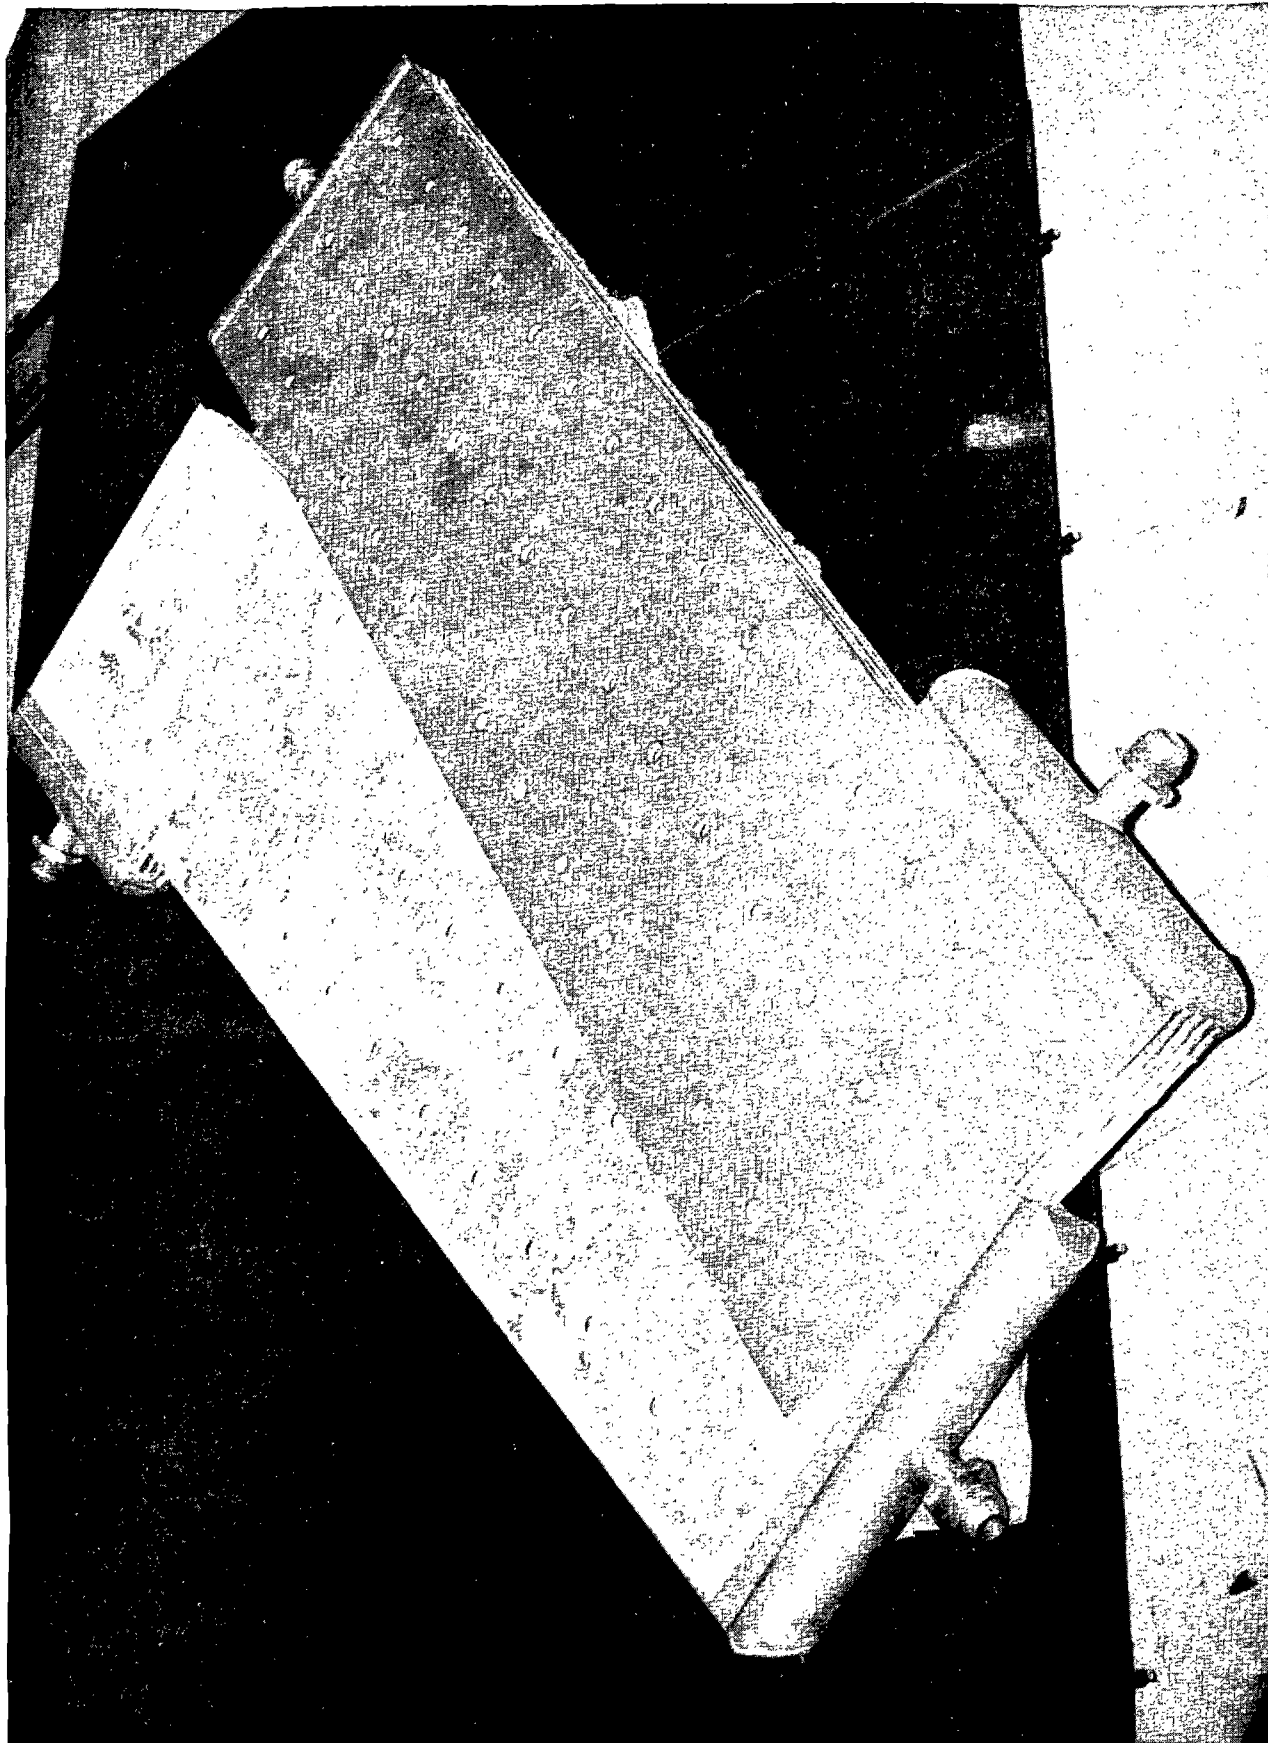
ASSEMBLY OF CONTACT HEAT EXCHANGER
